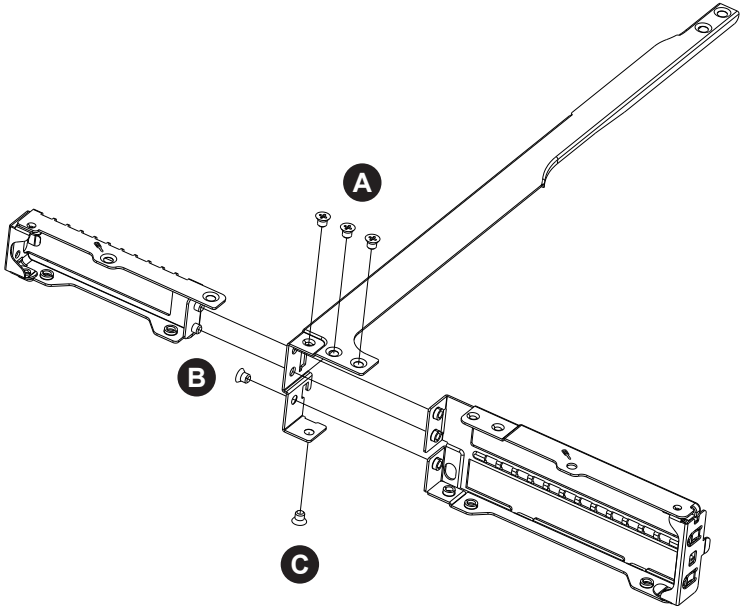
Riser Card Bracket Used with Twin Motherboards
